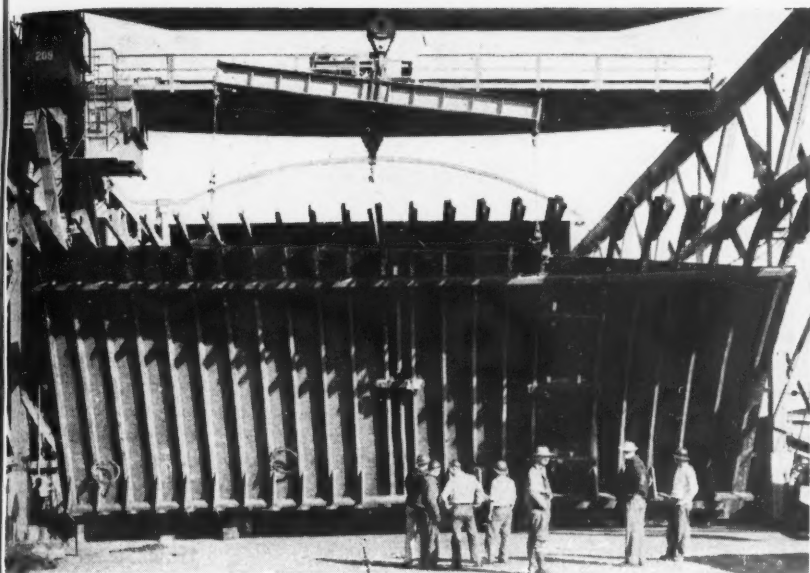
Overhead Crane Picking up a side shell Section that has been Fabricated in Horizontal Position, Making for Convenience and Encouraging Good Workmanship
